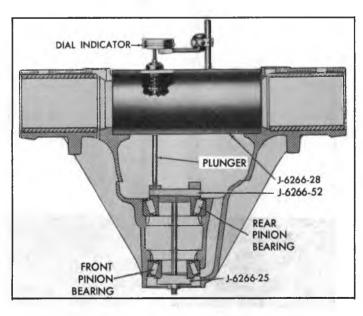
B-Installed View of Pinion Depth Gauge (Light-Duty Passenger Axle)
